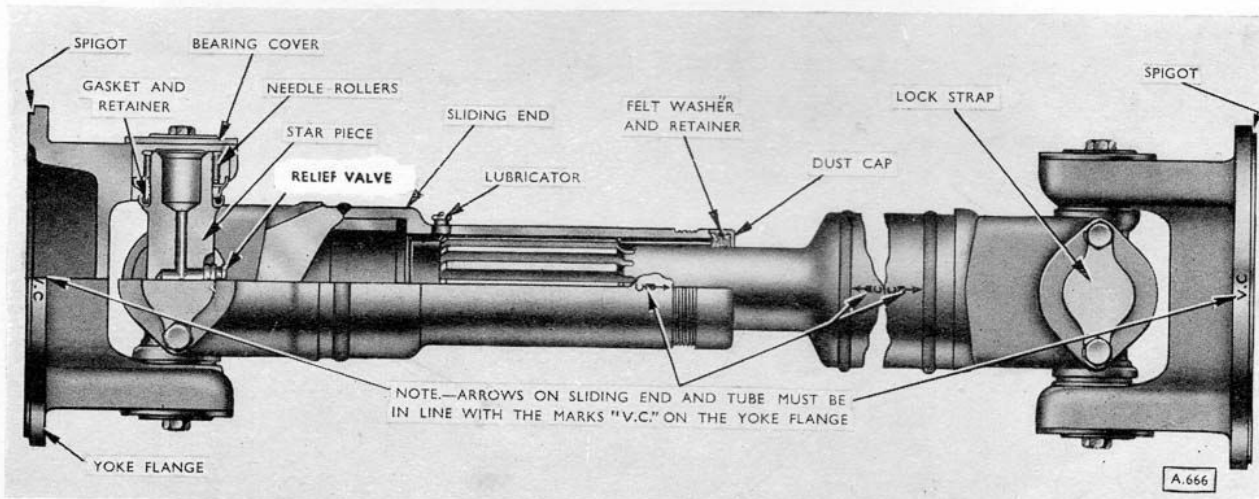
Section through propeller shaft—needle roller bearing type joints.
